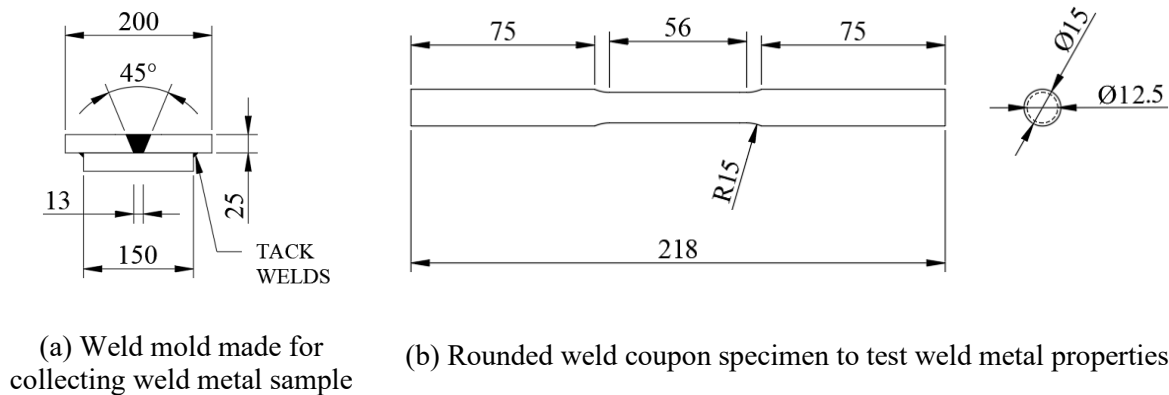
Drawings to fabricate weld coupon specimens.
